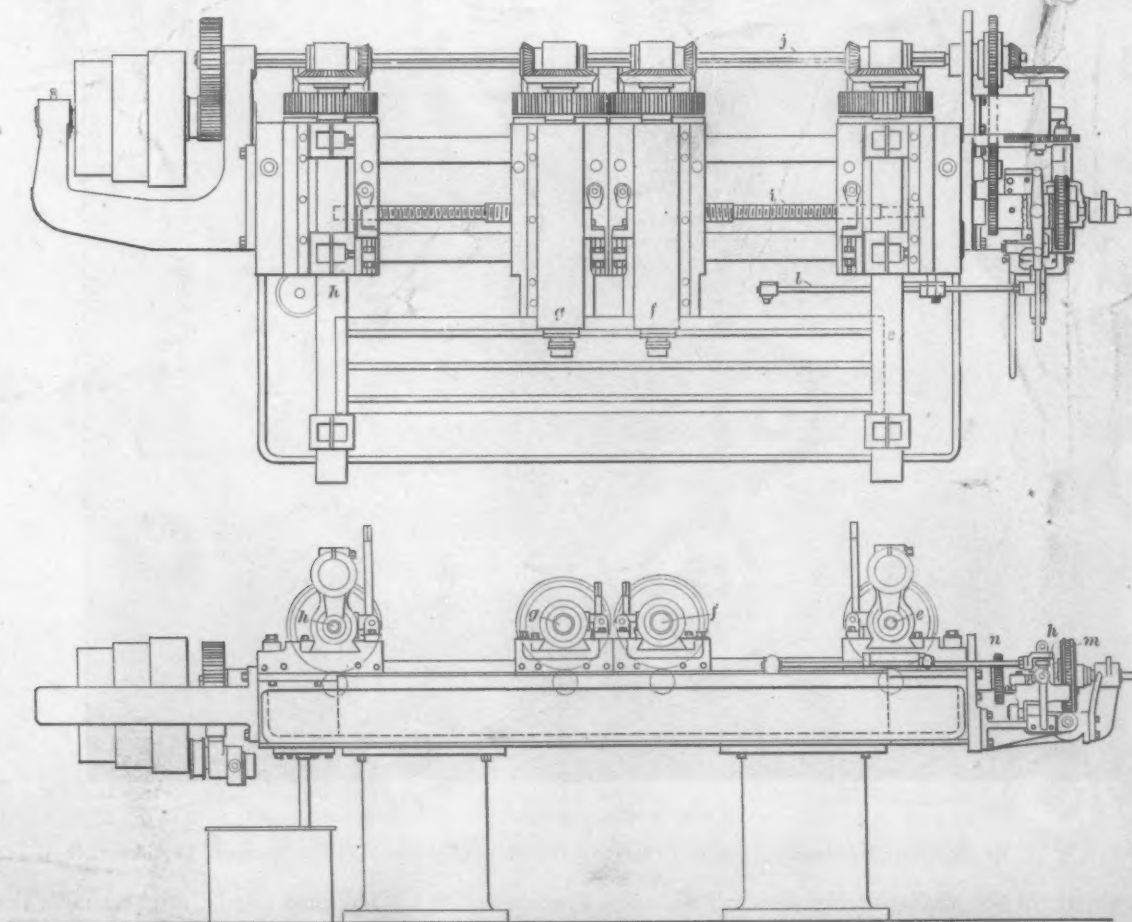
Top View and Front Elevation of the Beaman & Smith Axle Milling Machine.
